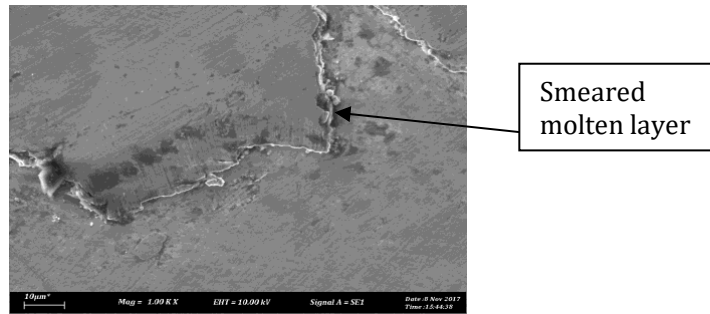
Smeared molten layer was observed on the workpiece surface during standard run 2 (cutting speed: 120 m/min, feed rate: 0.30 mm/tooth, depth of cut: 0.30 mm).
